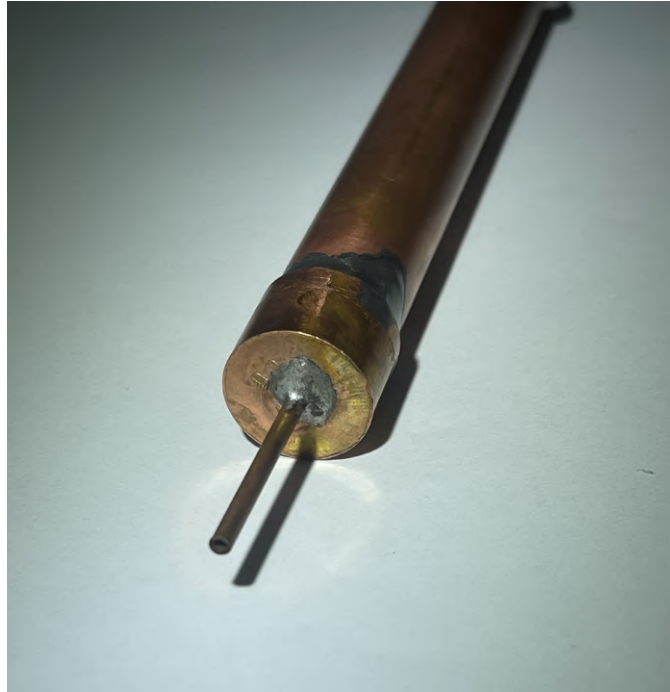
Constructed Prototype with Soldered Cap and Straw
